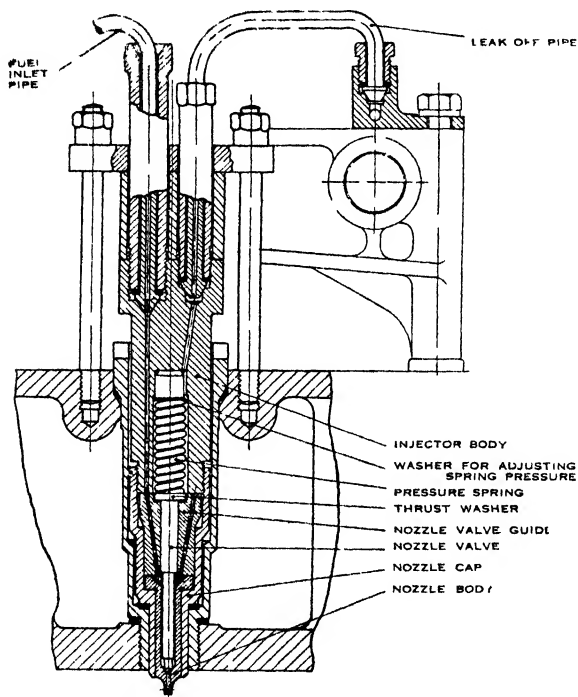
Armstrong Saurer Fuel Injection Nozzle in Cylinder Head
